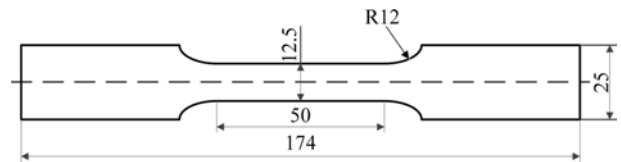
Specimen shape for uniaxial tensile test (Unit: mm)
